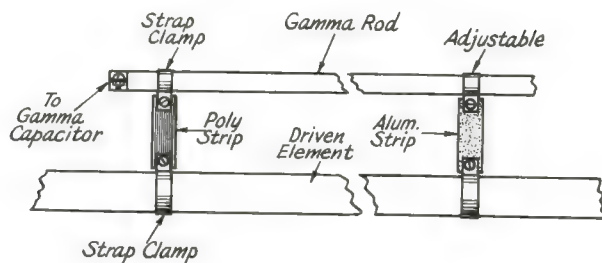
Method of mounting gamma rod. See table of Fig. 12-12 for dimensions.
